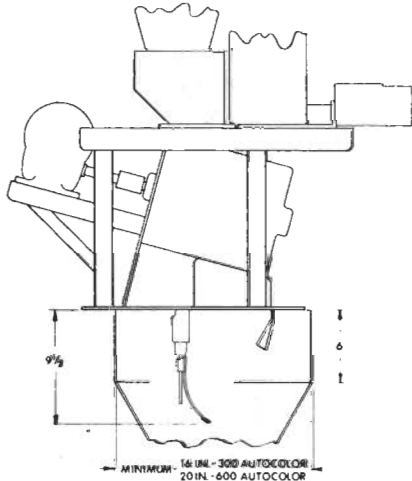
A Minimum machine hopper dimensions for Auto-color mounting.
